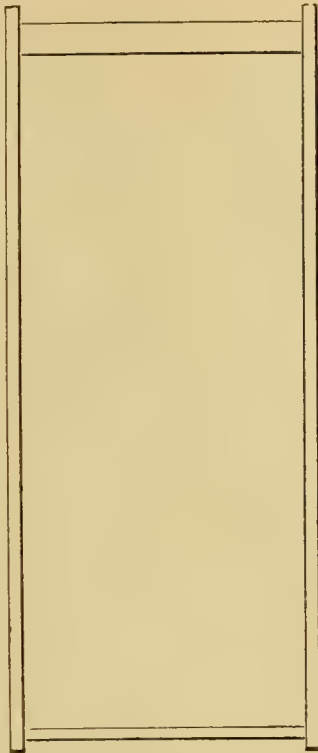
FRAME FORMING BACK OF CHAIR.
